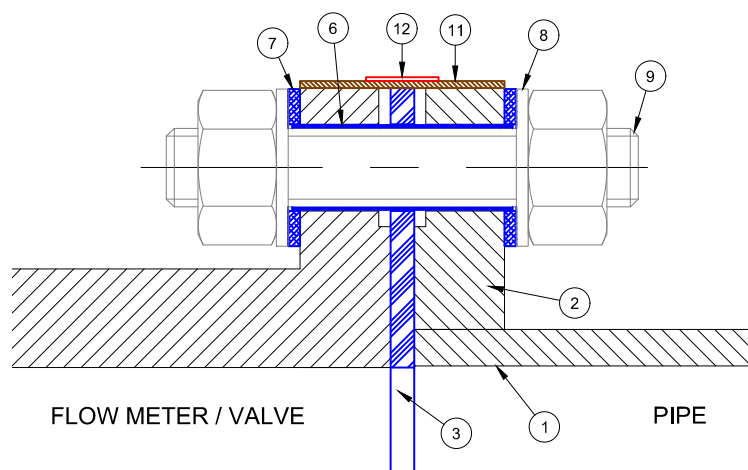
STANDARD FLANGE & INSULATED SUPPORT BRACKET
